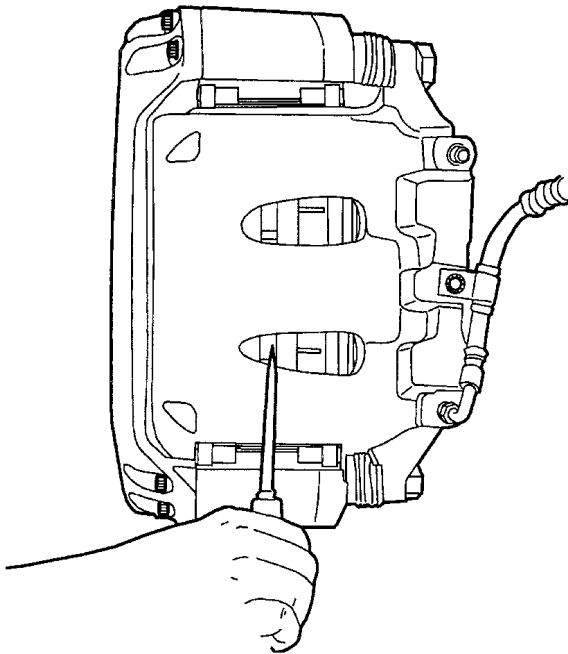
Push Caliper Outboard Pushing Pistons into Piston Bores
